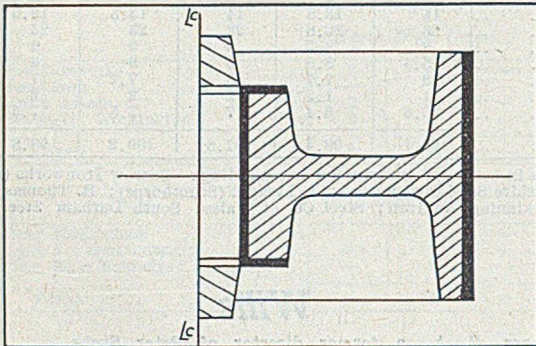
Plan View of a "Set-out" on a Board for a Section of a Pattern.
